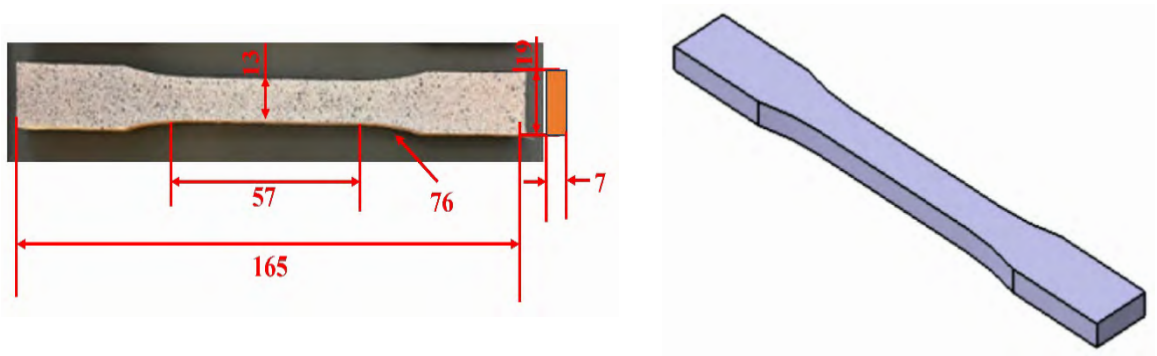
a) ASTM D638 Type I Tensile testing specimens (units in millimeters) [67], b) CAD design tensile specimens.
